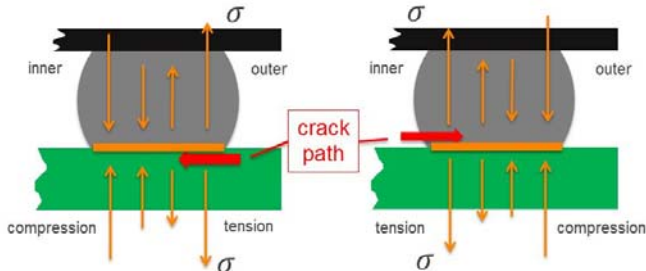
Illustration of crack path competition in corner BGA solder joints due to cyclic oscillations after drop. Stresses due to (a) downward board deflection at initial drop impact and (b) upward rebound deflection.
